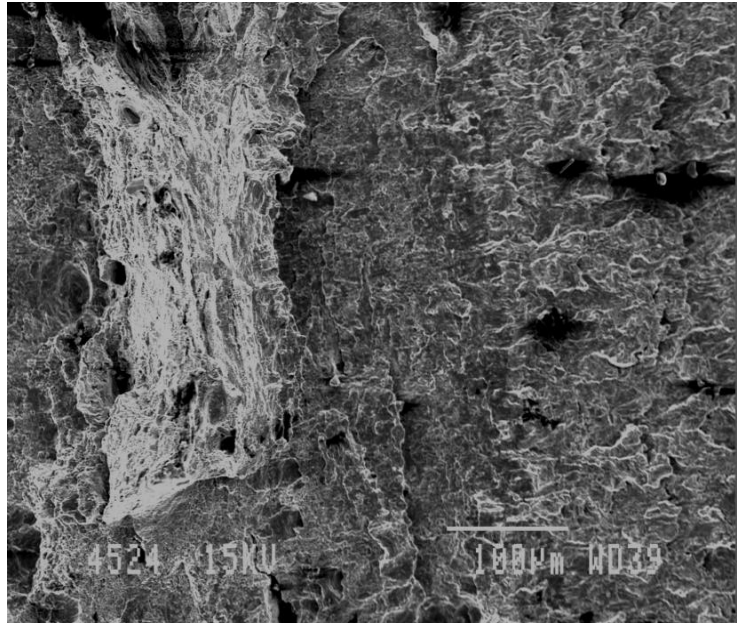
Typical SEM fractograph of SZW of J-integral tested specimen(GM-04) showing alternation stretch and void coalescence ahead of the fatigue pre-crack.
